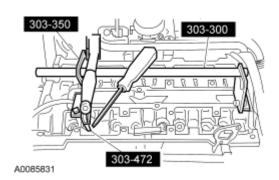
Identifying Special Tools (303-300, 303-350, 303-472) Courtesy of FORD MOTOR CO.
